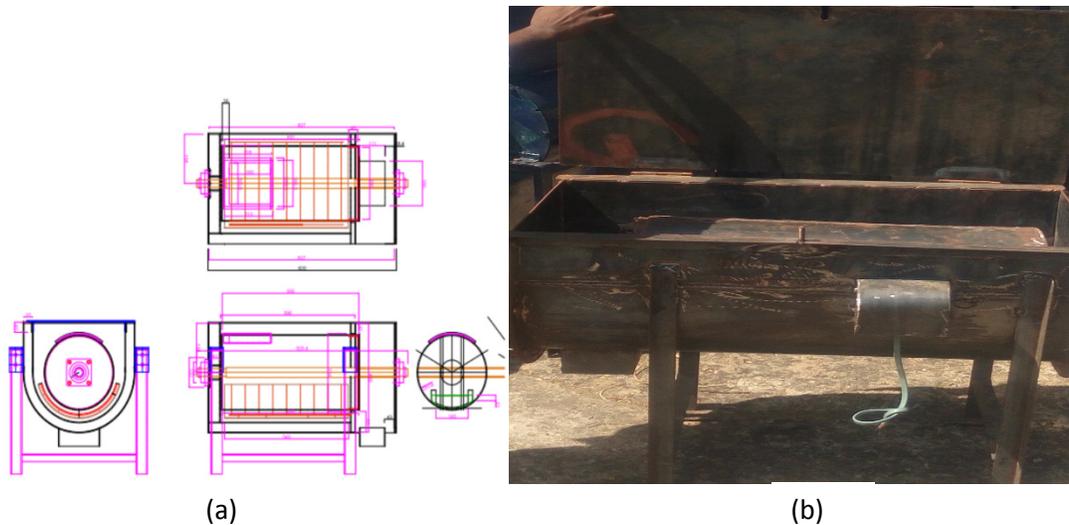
(a): Engineering drawing for production (b) Fabricated garri frying machine
